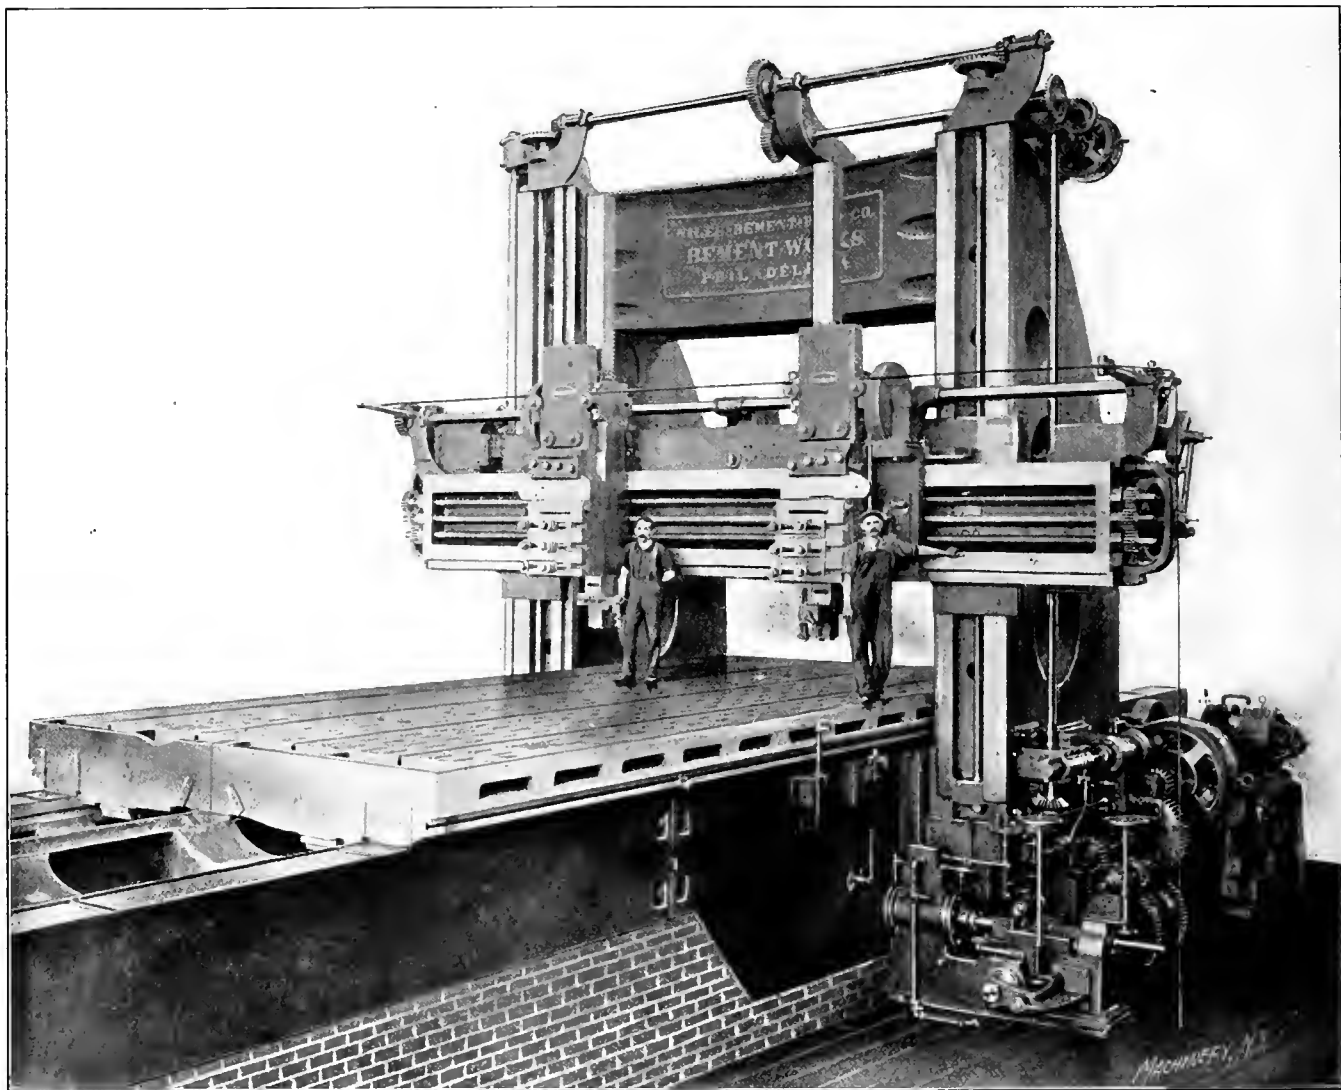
General View of the Planer showing the Slotting Attachment and the Feed Mechanism.
